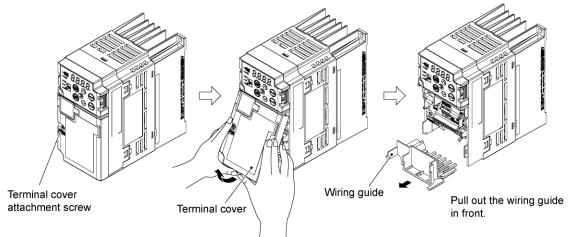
Removal of the Terminal Cover and the Wiring Guide (for FRN0006E2S-2D)
